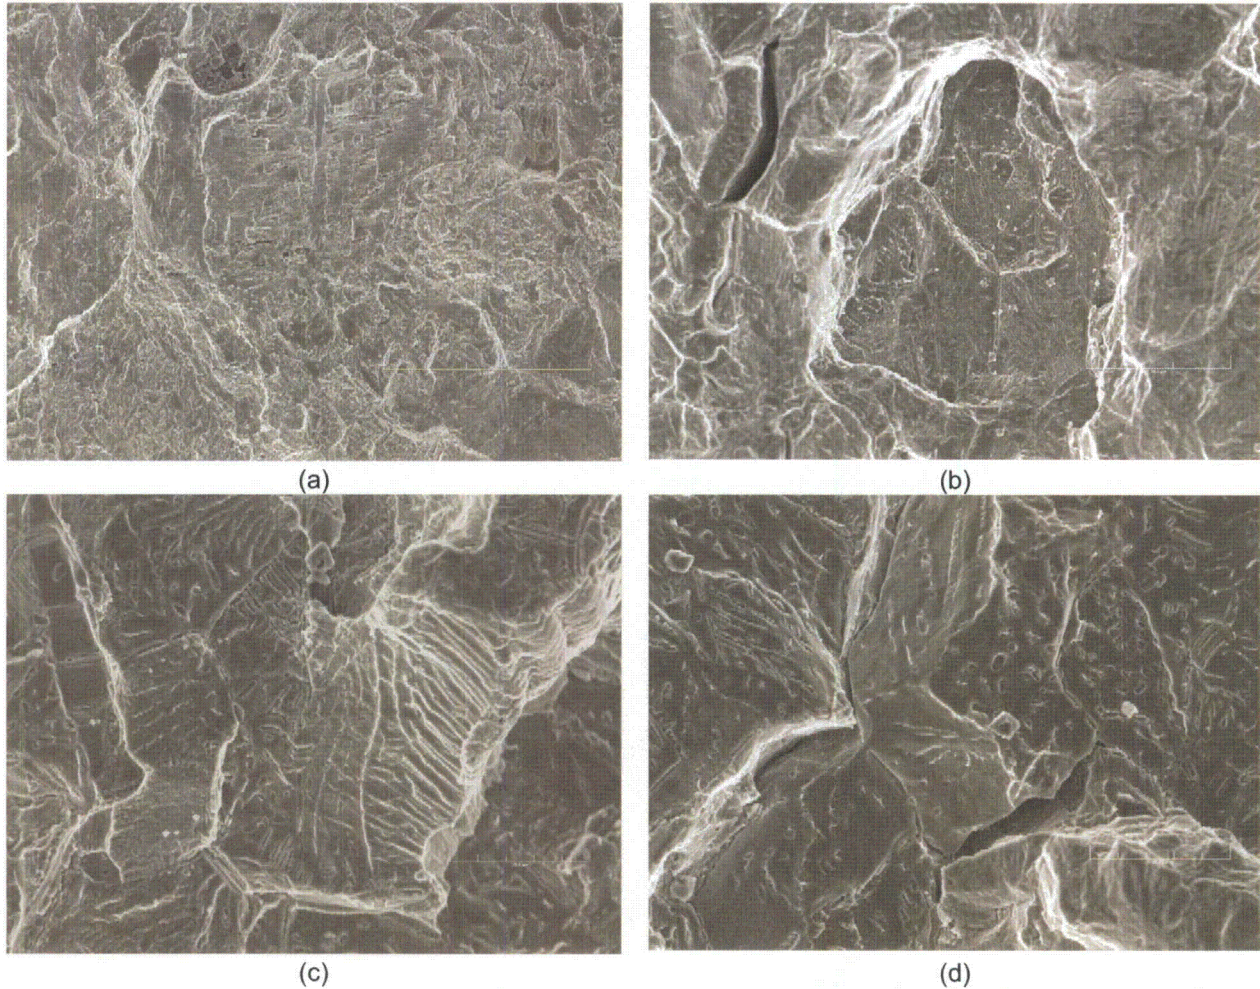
Fracture modes observed on the fracture surface of A690WC-SL-1: (a) transgranular; (b,c) faceted with elements of IG; and (d) IG showing carbides on the facets. Crack advance is from bottom to top.
